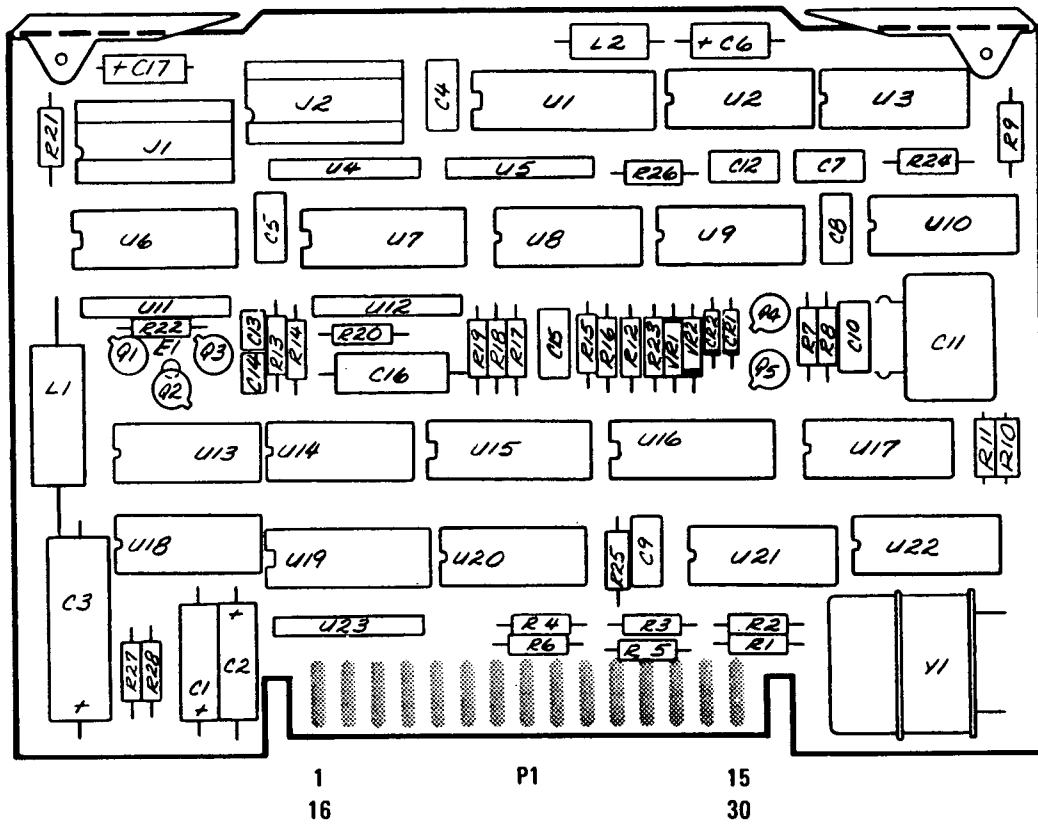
A11 DVM Digital Assembly, Component Locations
